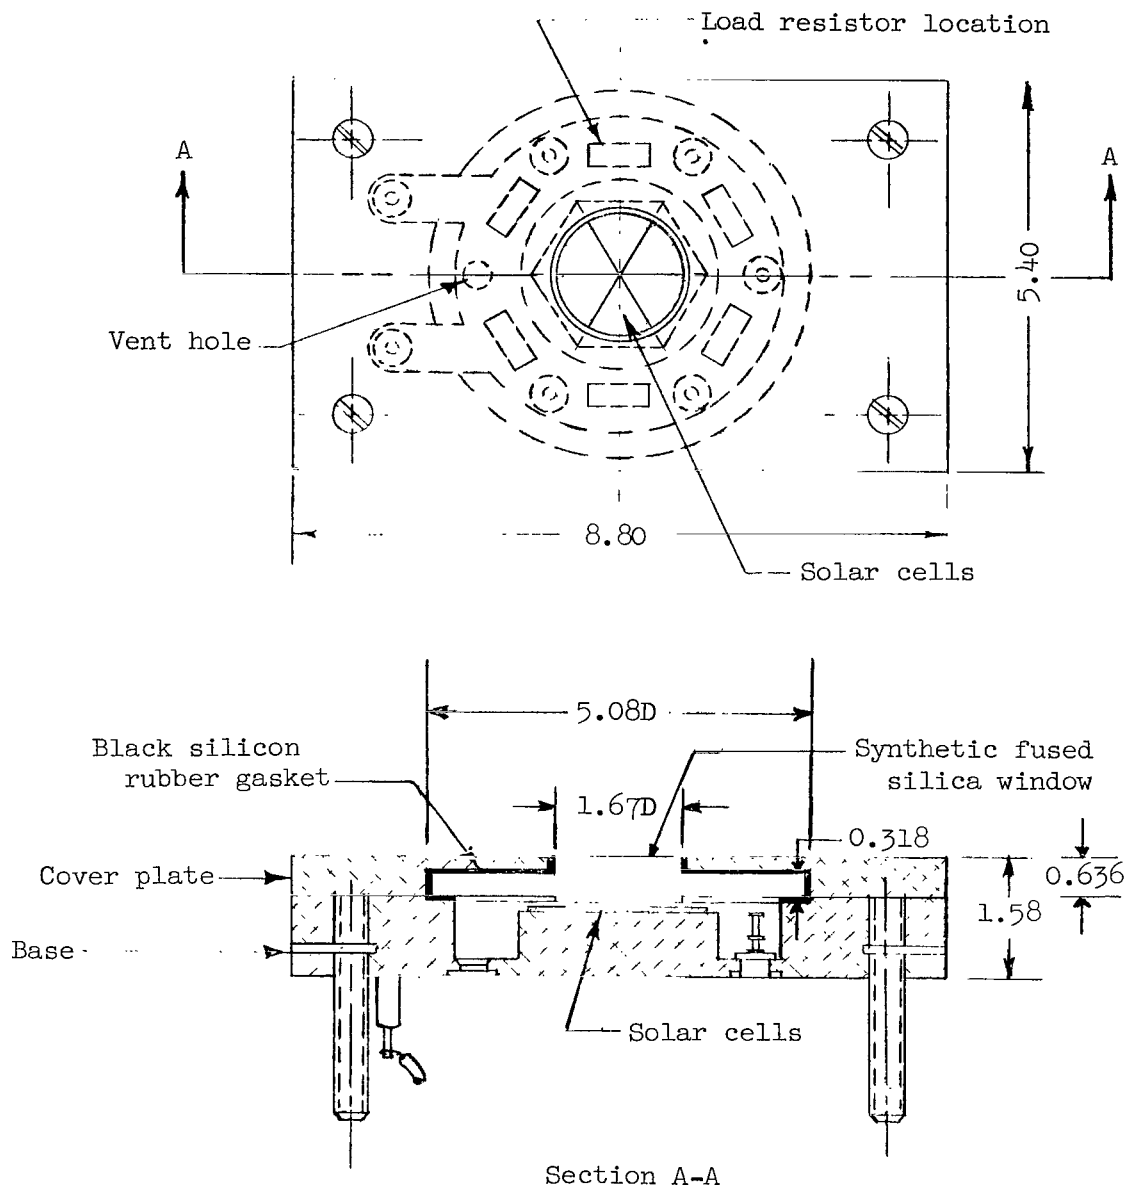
Solar aspect sensor assembly. All dimensions are in centimeters.
